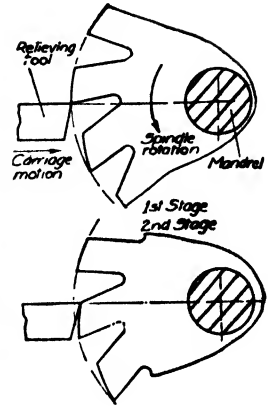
Principle of Operation of Form-type Cutter Relieving Attachment.
